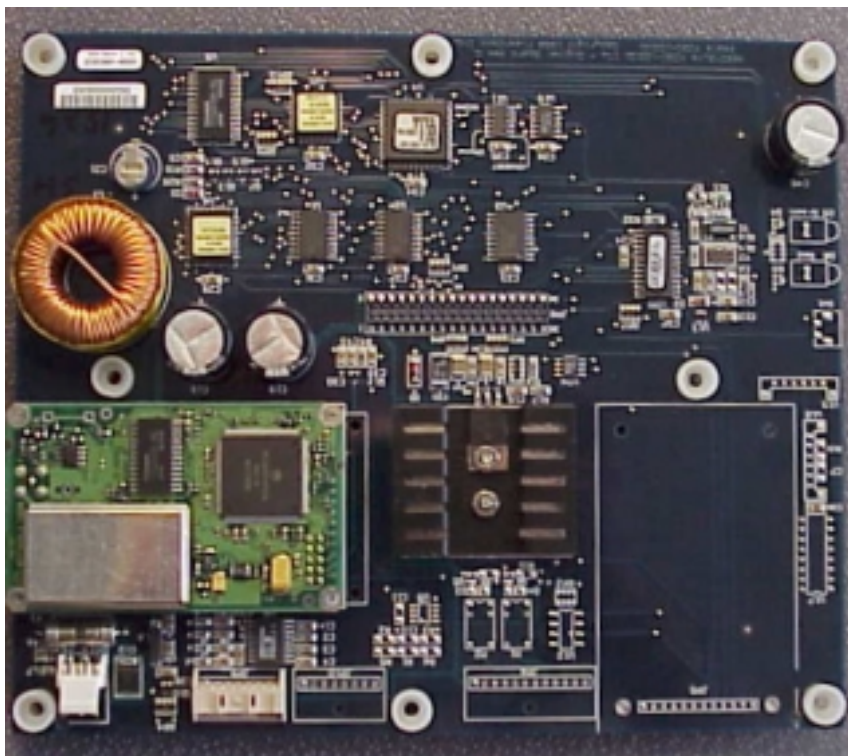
GPS, Digital and Power Supply Printed Circuit Board Assembly
